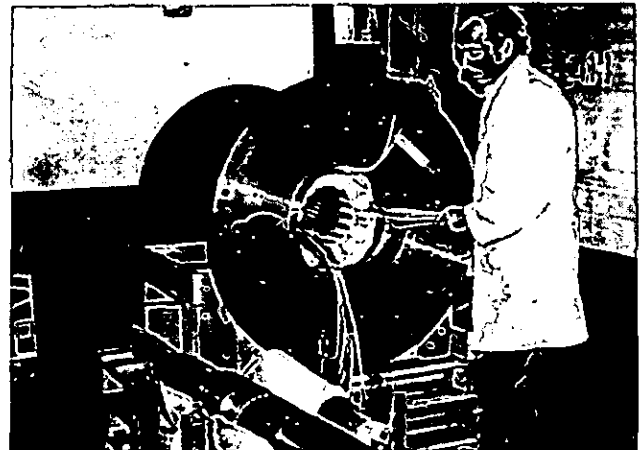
Helium Circulator with Magnetic Bearings (Courtesy HRB, Germany)
